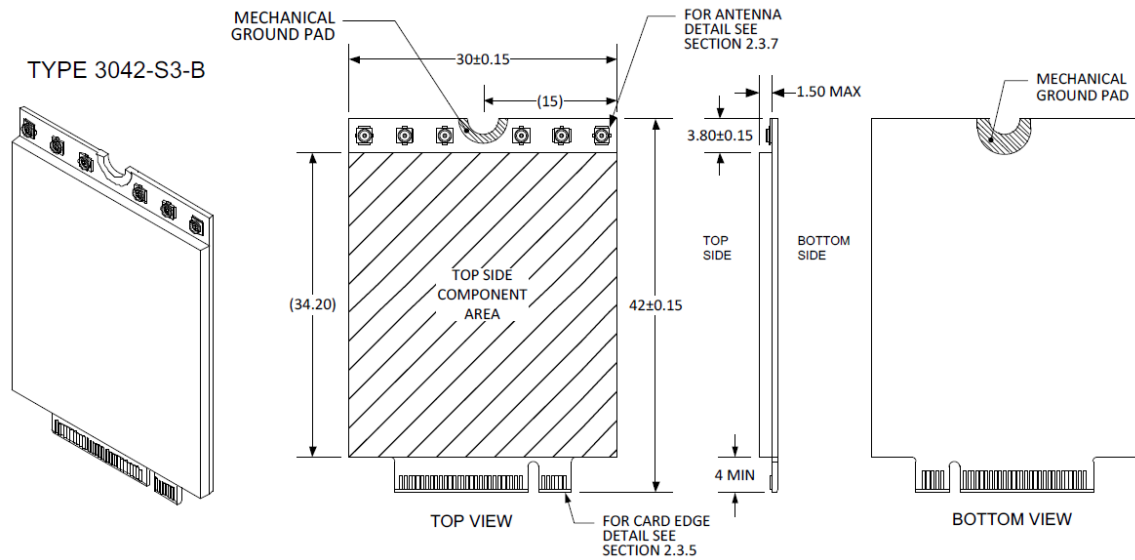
Standard Dimensions of M.2 Type 3042-S3 (Unit: mm)
